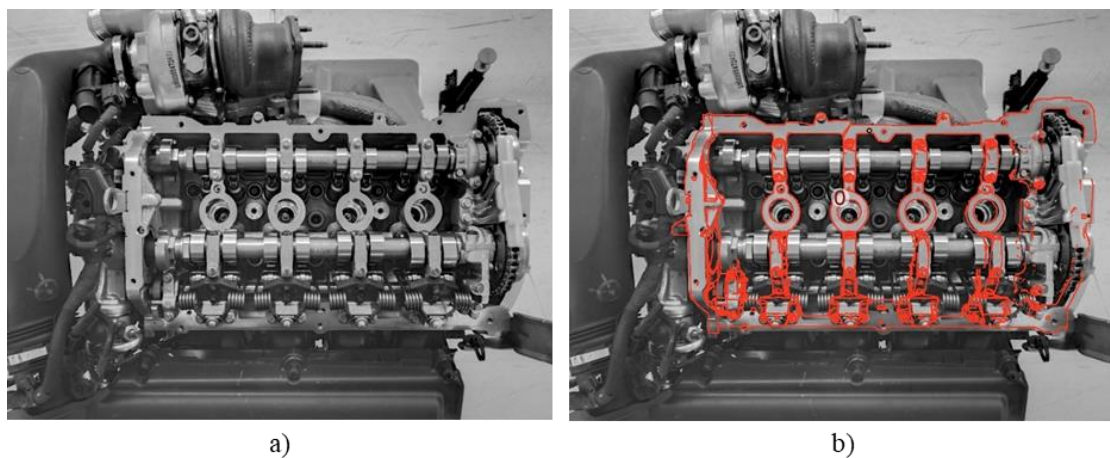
a) Motor part, b) Motor part pose estimation using CADMatch technique
